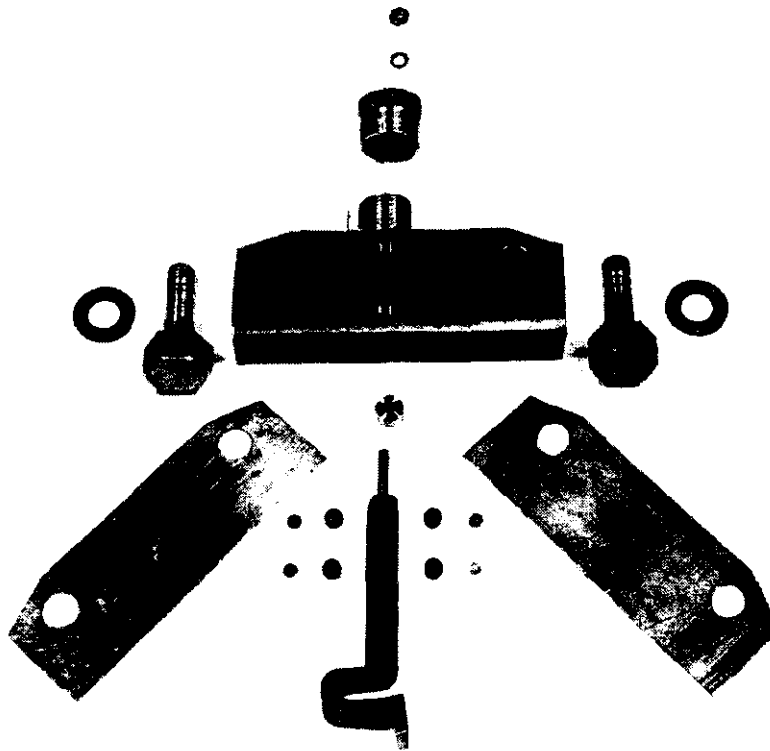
SEPARATE PARTS BEFORE ASSEMBLY
